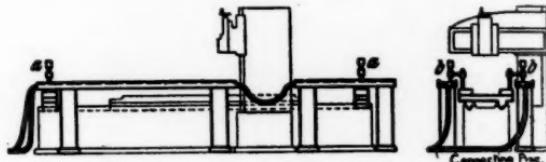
Checking the movement of a planing machine using two lengths of channel iron as liquid container. Measuring points aa lengthwise, bb crosswise.
